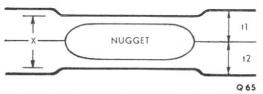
Section through weld, giving dimensions for measuring indentation.
